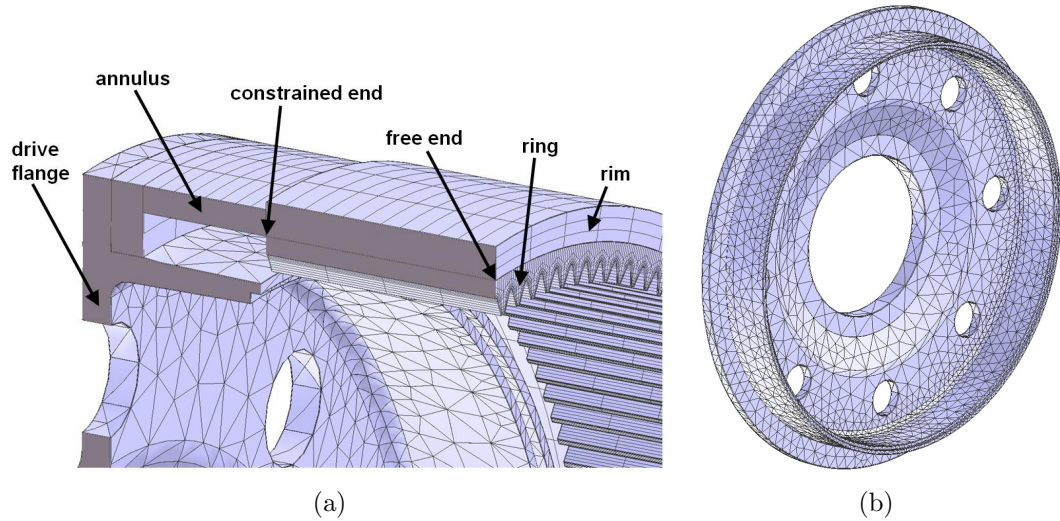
(a) Cutaway view of the finite element model of the stage 2 ring gear, drive flange, and annulus, and (b) externally meshed drive flange 2.
